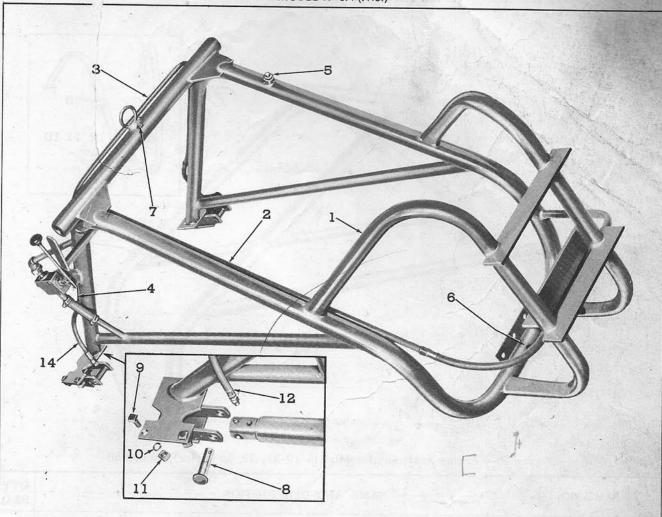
Frame Assembly for Model 19-8A (Prior)
